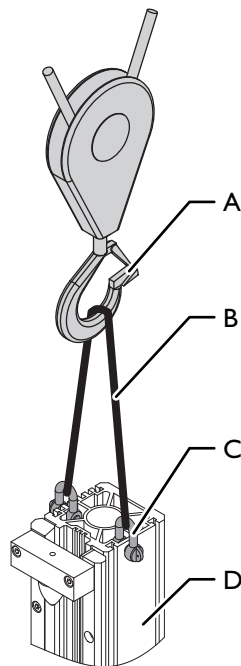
Attaching the slings: Z-axis, sizes 2-5
